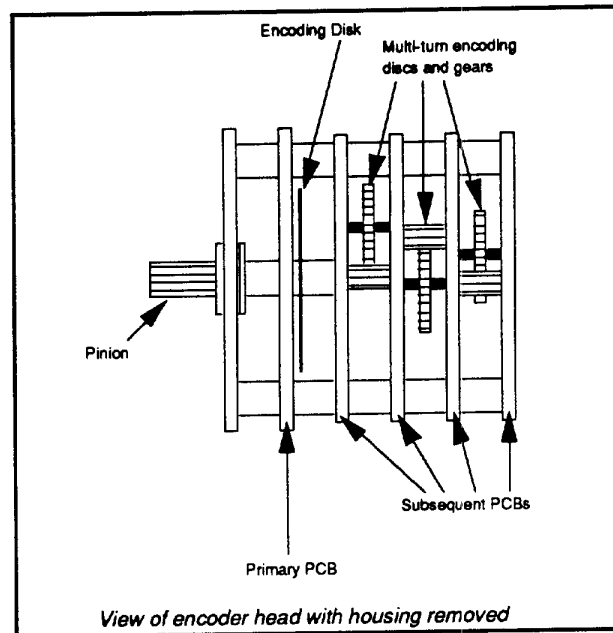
Internal View of Multi-Turn AL-C Encoder Head
